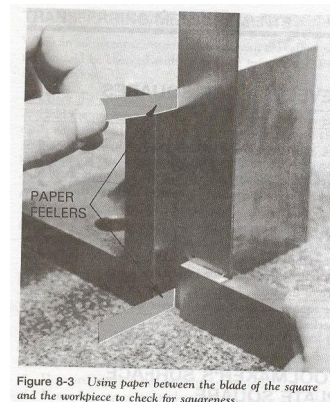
Using paper between the blade of the square and the workpiece to check for squareness.
